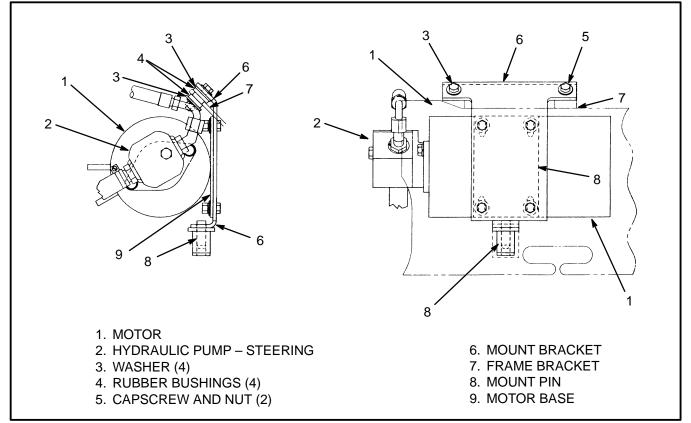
E1.50-2.00XM (E25-40XM) STEERING PUMP AND MOTOR
